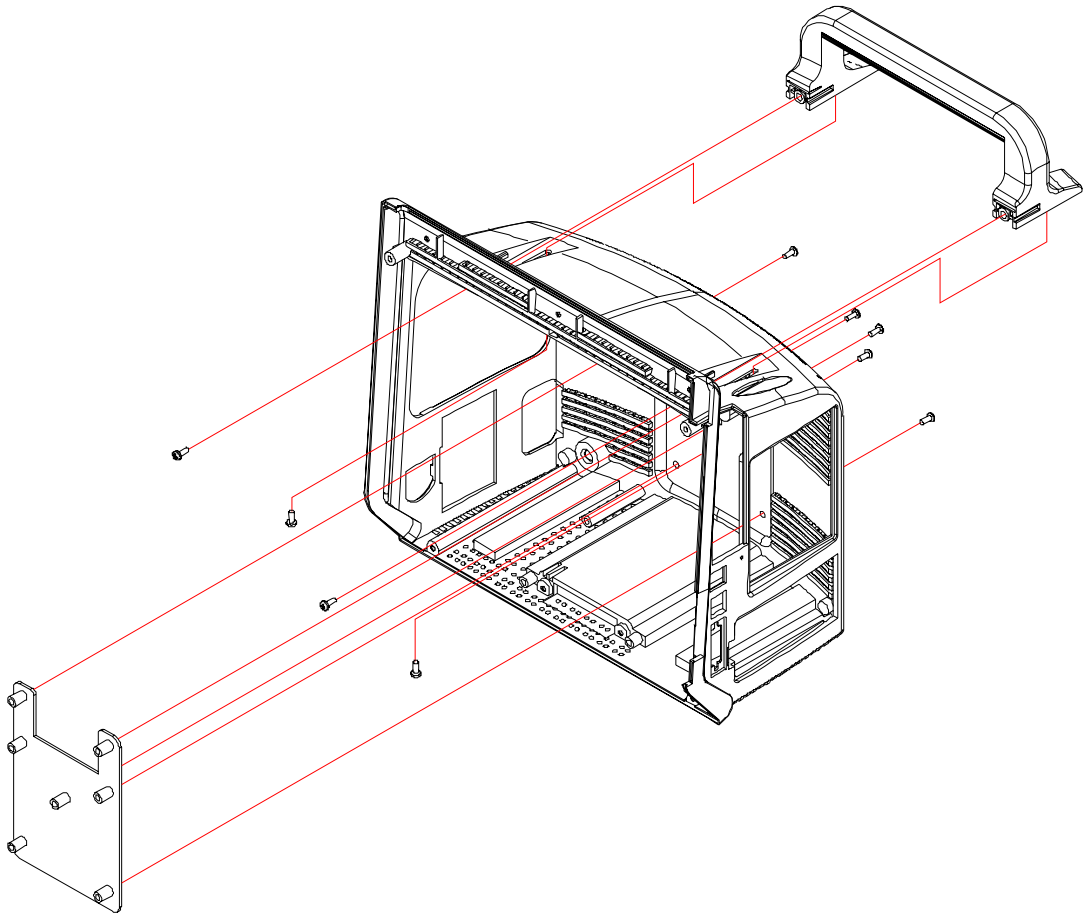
Rear Case Disassembly – VESA Bracket, Handle
